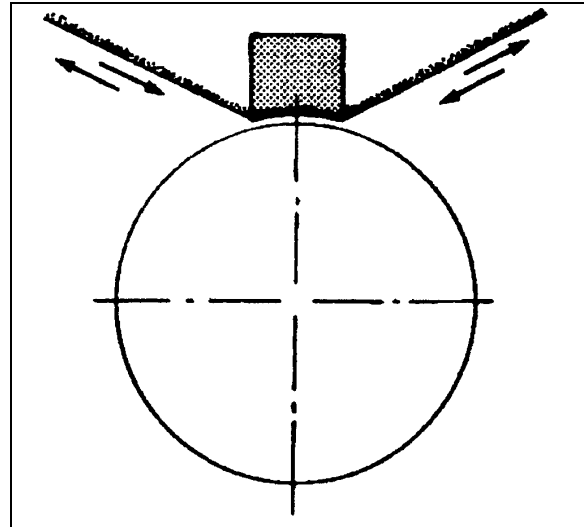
IMPROPER GRINDING TECHNIQUE 22318
